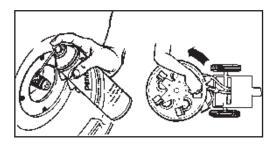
Lubricate Shaft and Re-install Head Assembly
